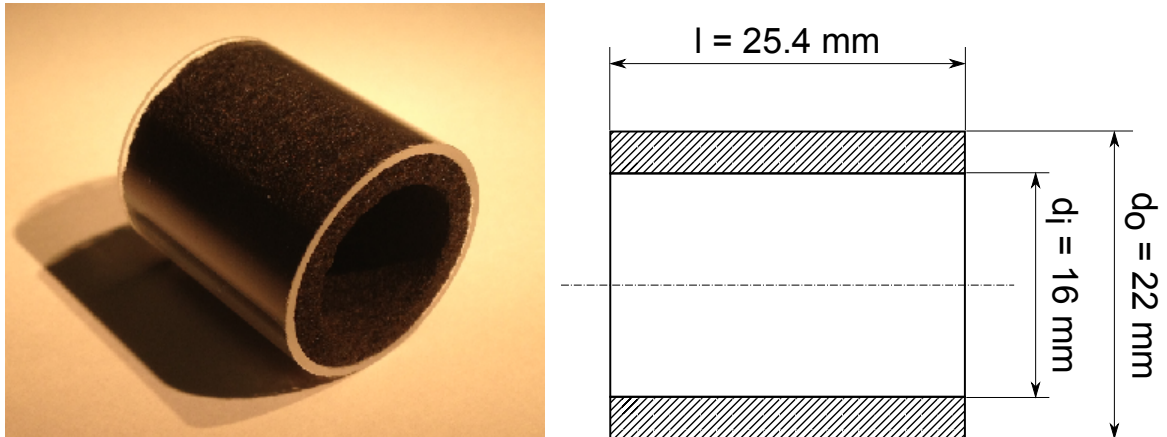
Hollow cylinder carbon preform sample. The top picture shows the specimen fit into the glass holder, on the bottom sketch of the specimen geometry is detailed.
